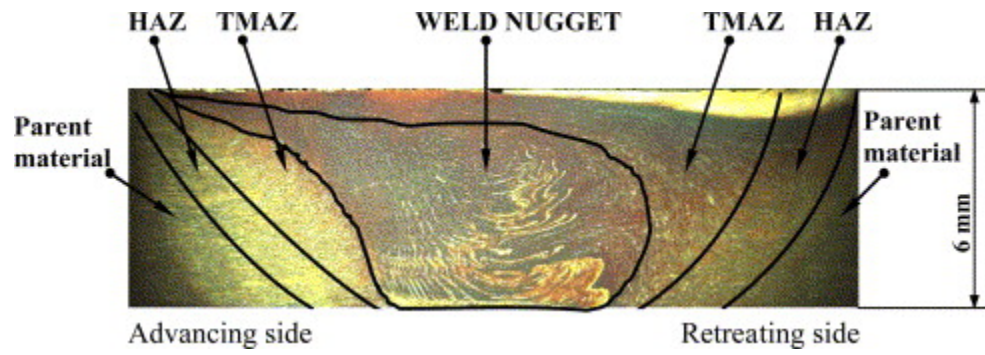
Weld zones in FSW: unaffected zone, HAZ, TMAZ, and weld nugget [14]
